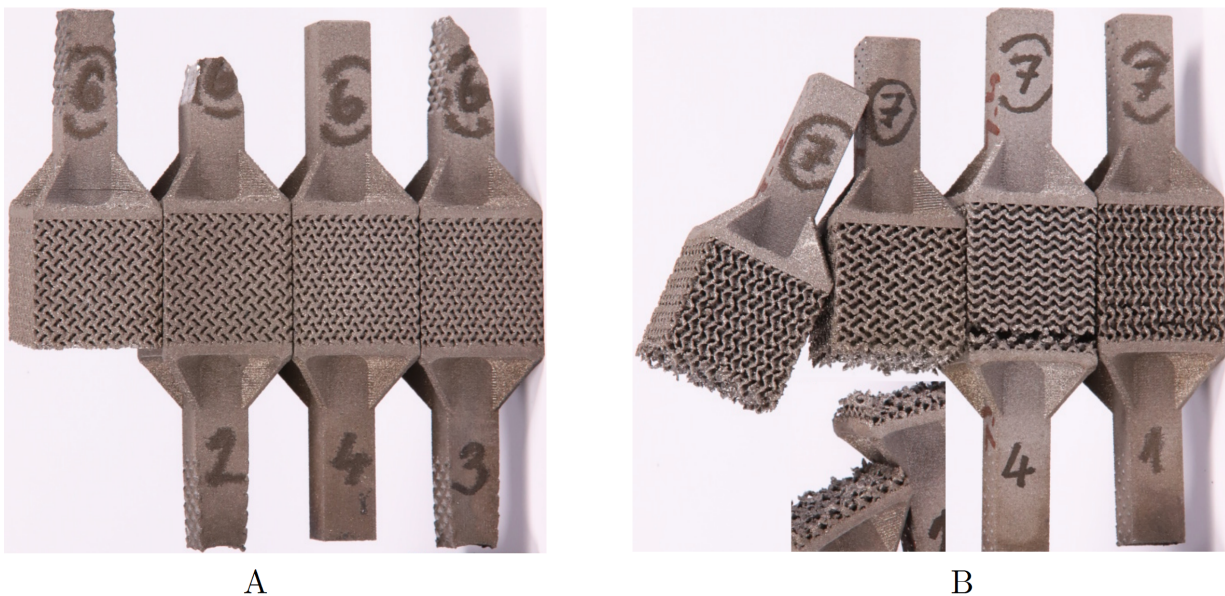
Defective gyroid tensile test specimens. Their brittle fracture and internal defects, which were not initially observable, made the tests unreliable and had to be terminated. The specimens are displayed upside-down from the direction of printing. Image taken from a co-authored work [124].
